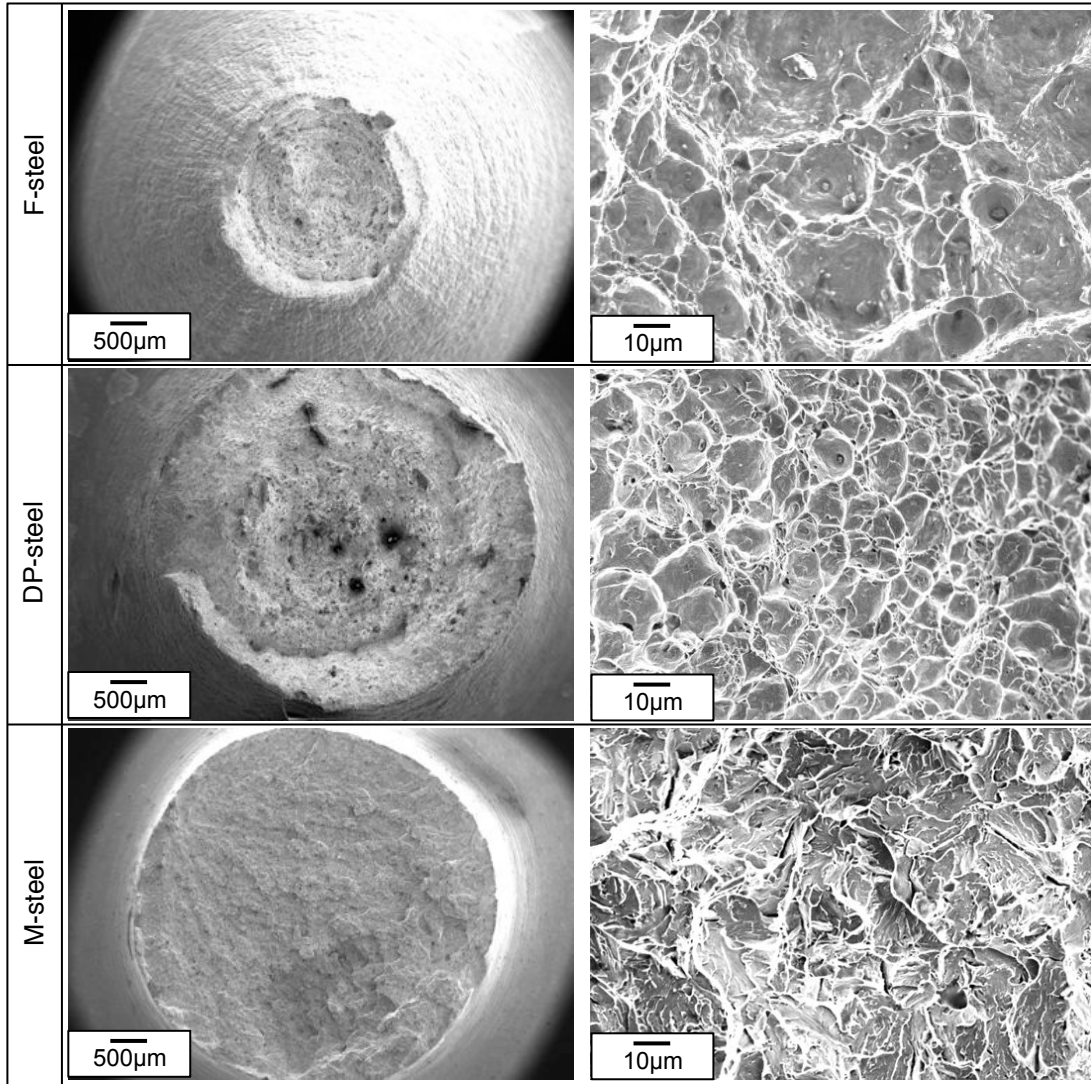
Fracture surface of notched round-bar specimen (R1.5 specimen) of steels used.
